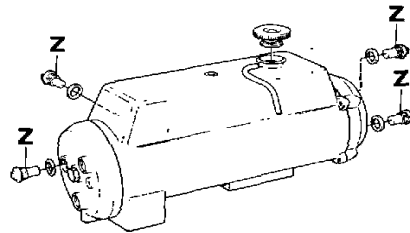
Tubular heat exchanger, MD70, TMD70, TAMD70
